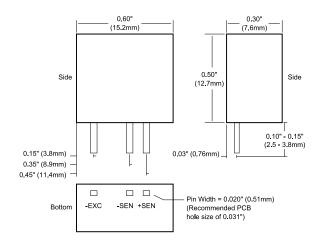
SCMXCJC Physical Dimensions and Pin Layout
